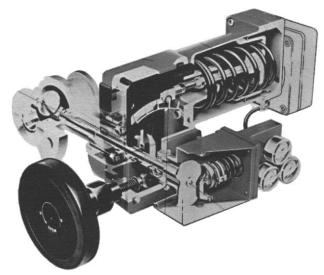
Rolling diaphragm actuator fitted to an eccentric plug valve
